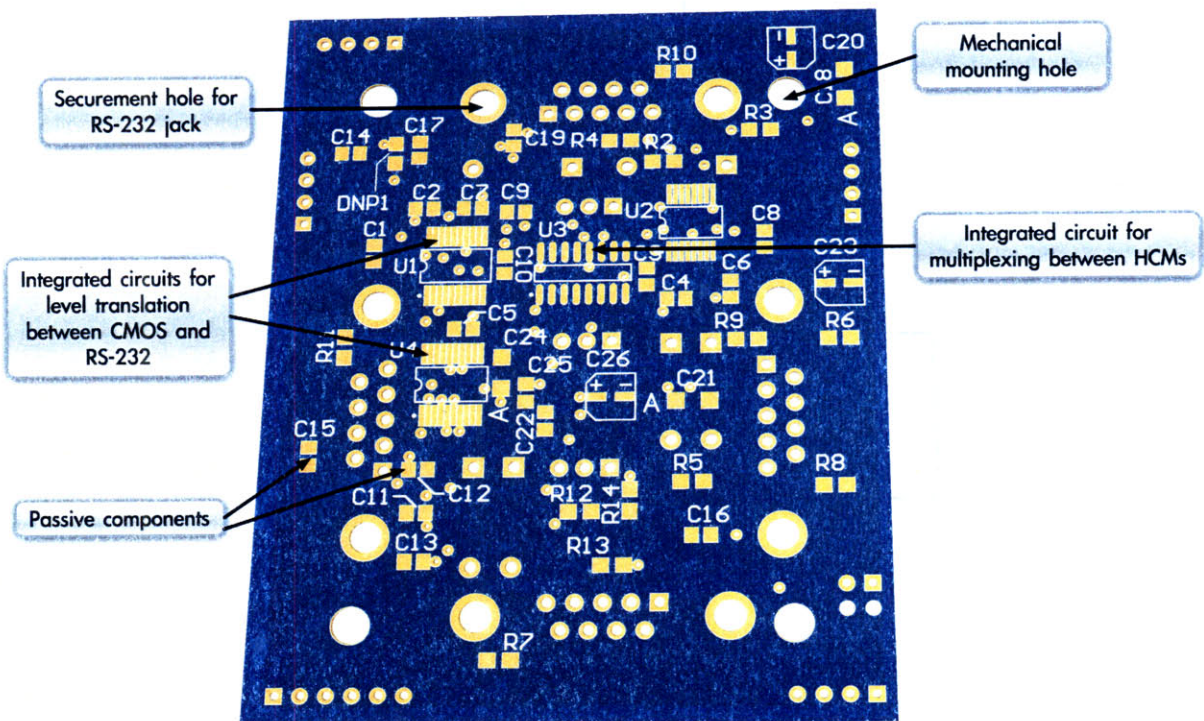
CAD rendering of the Multiplexing Aggregator board (back)
